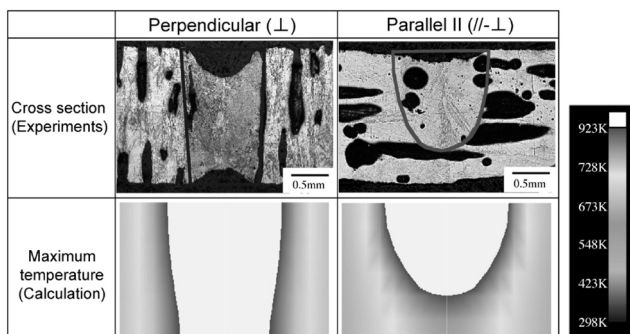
Calculated maximum temperatures for lotus-type porous magnesium. Porosity ; 35% , thickness ; 1.8mm, welding speed ; 5m/min, diameter of focus ; 0.6mm
